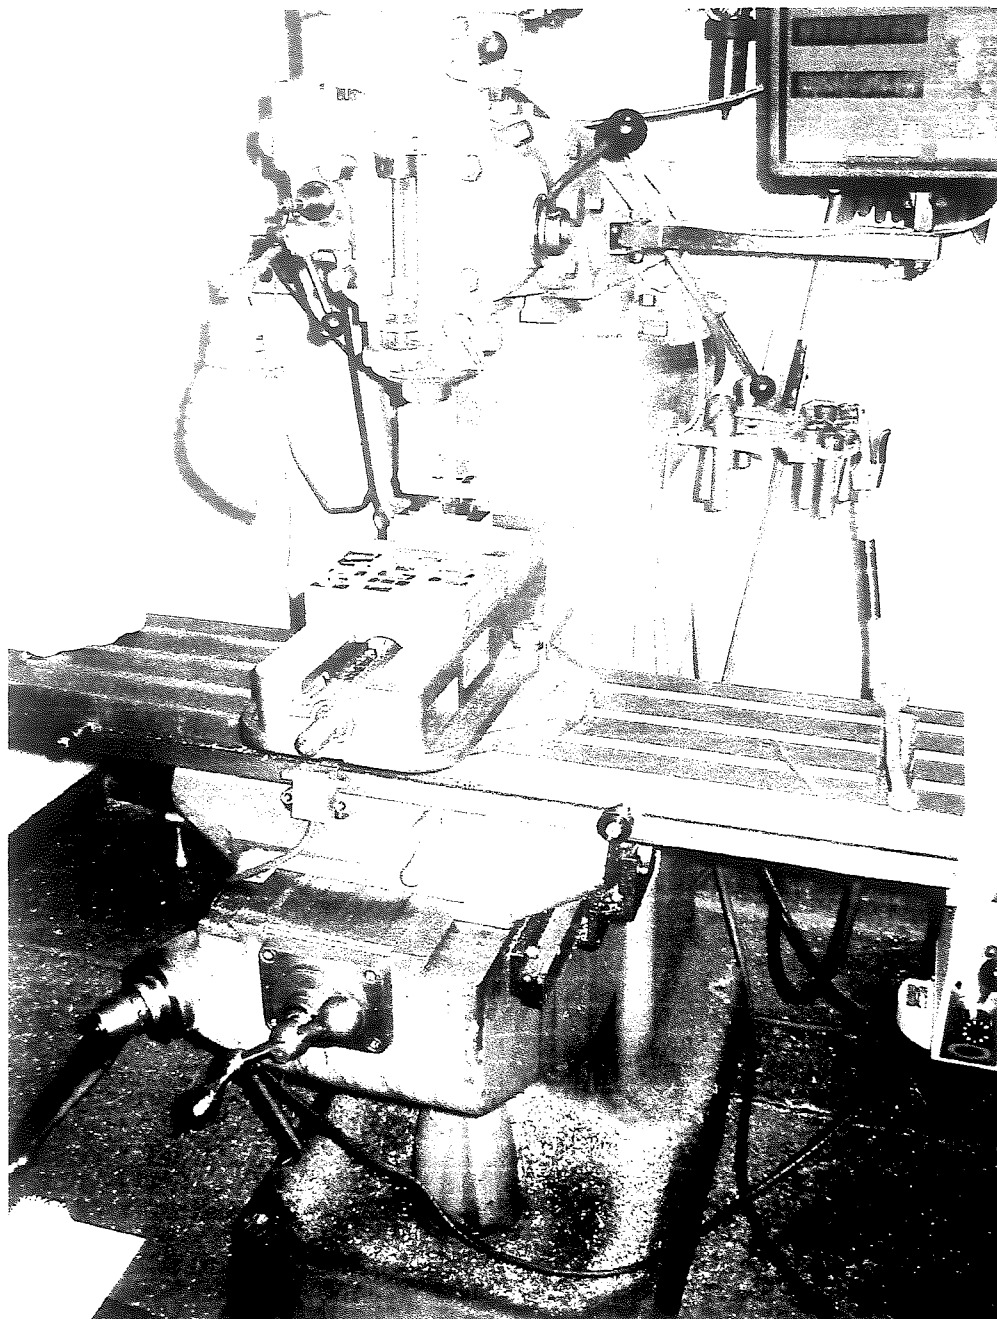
Photo of Bridgeport milling machine used for mechanical embossing
